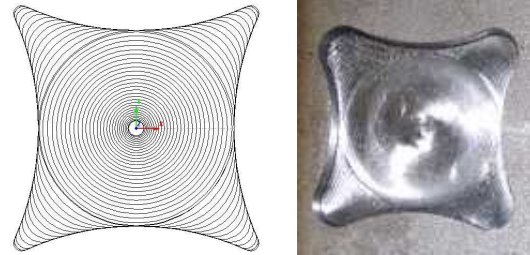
Tool paths and milled workpiece used for tool wear experiment (Dimensions of the shape 40×40×8mm)
